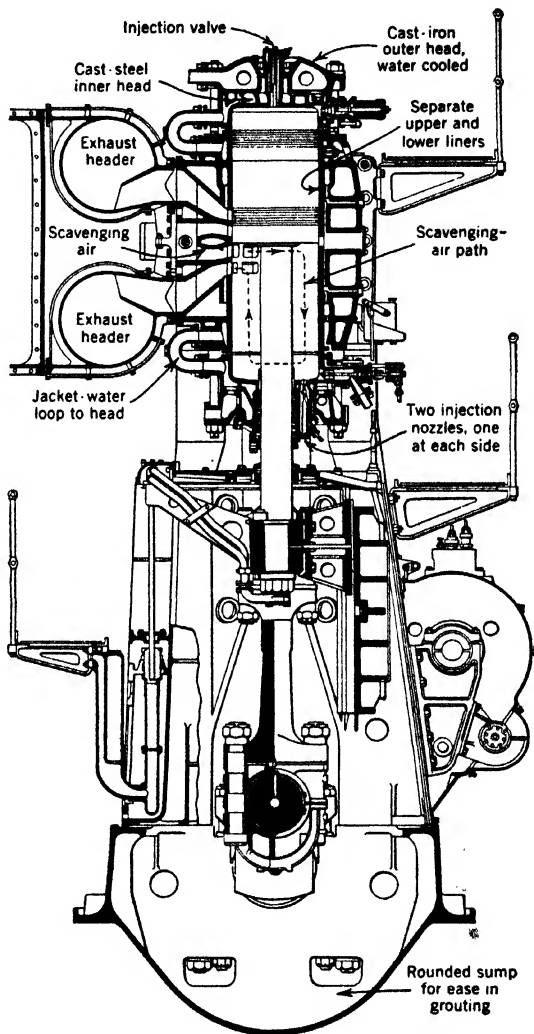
Section through cylinder of double-acting two-stroke cycle solid-injection Hamilton-M.A.N. Diesel engine.
